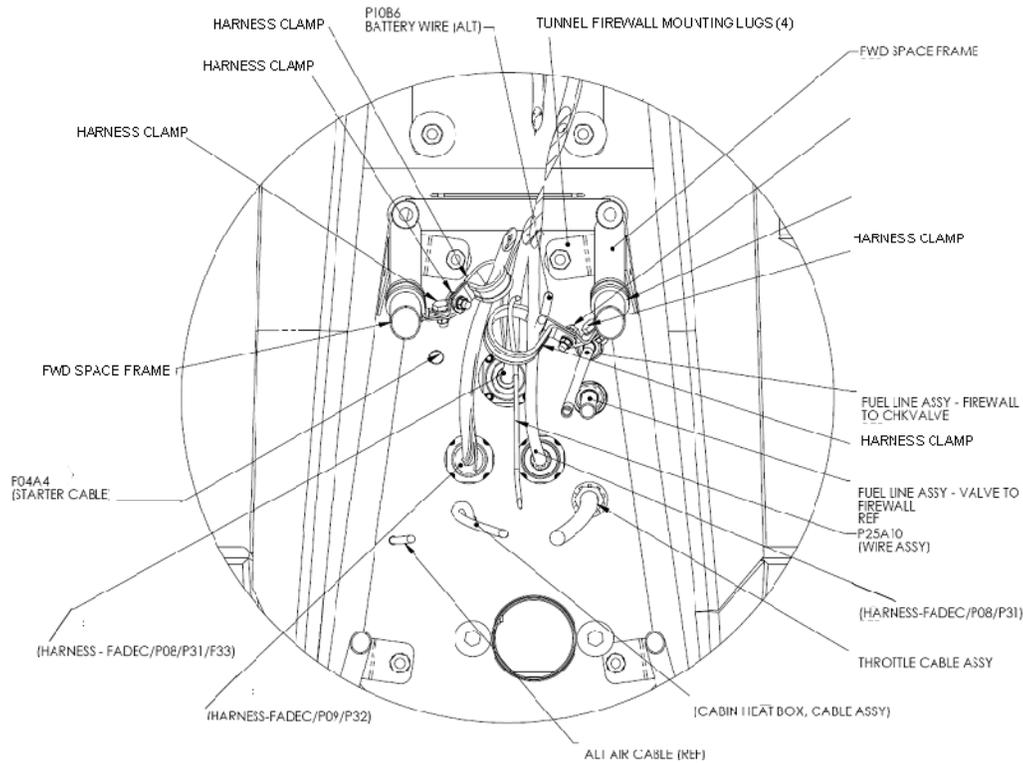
Tunnel Firewall Assembly Connects - Fuselage
